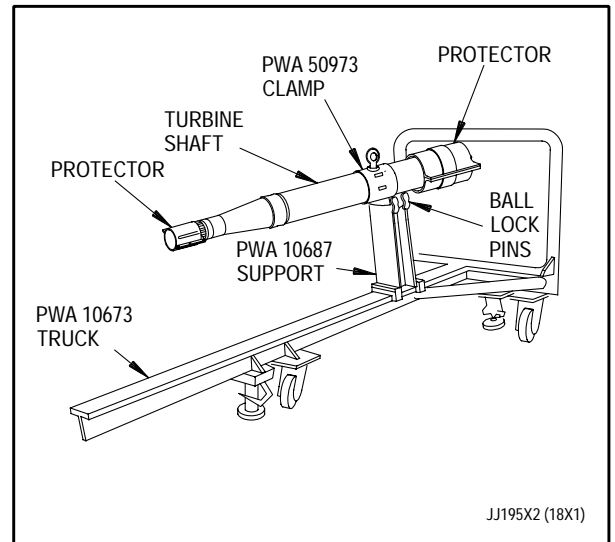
Front Compressor Drive Turbine Shaft - Removal (Sheet 3 of 3)
